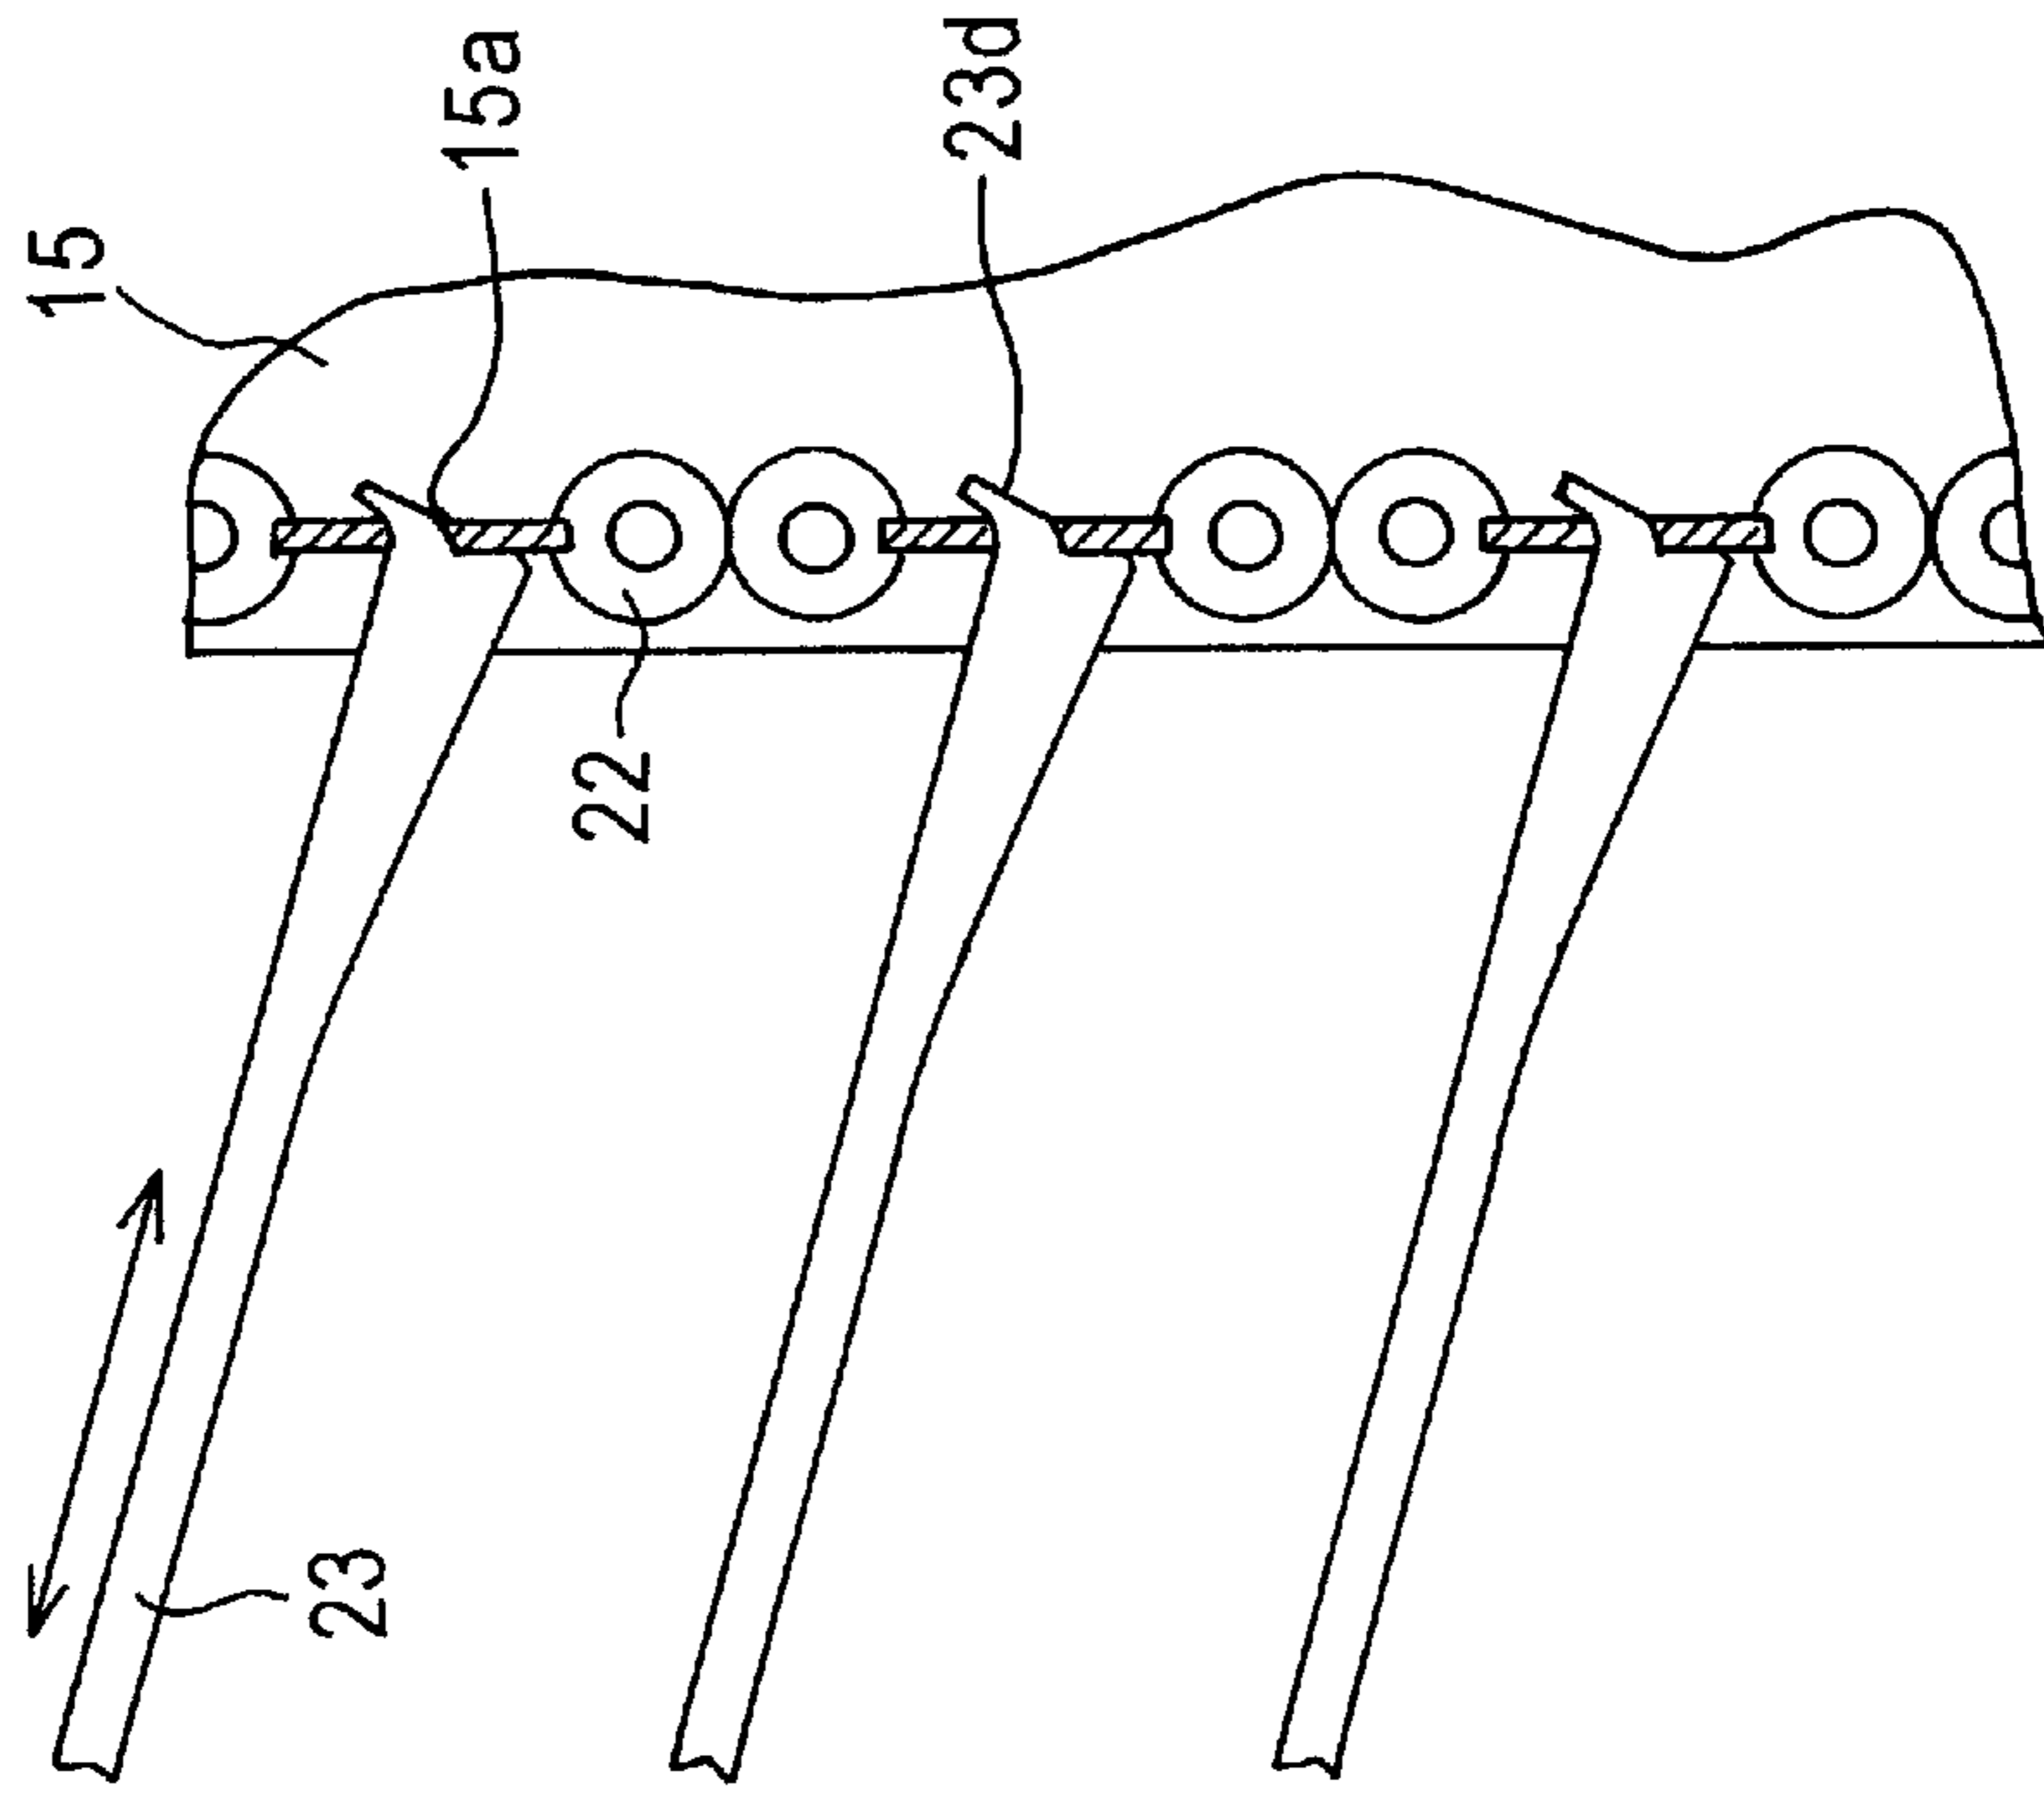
IMAGE FORMING APPARATUS HAVING SHEET POST-PROCESSING UNIT
